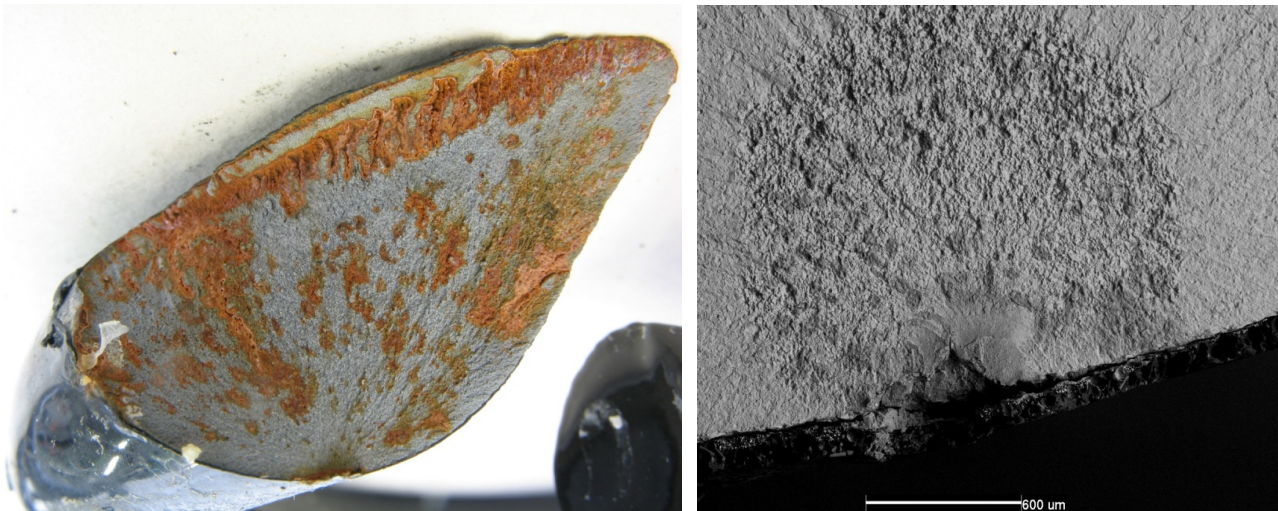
Fatigue fracture initiated by a corrosion pit [8]
